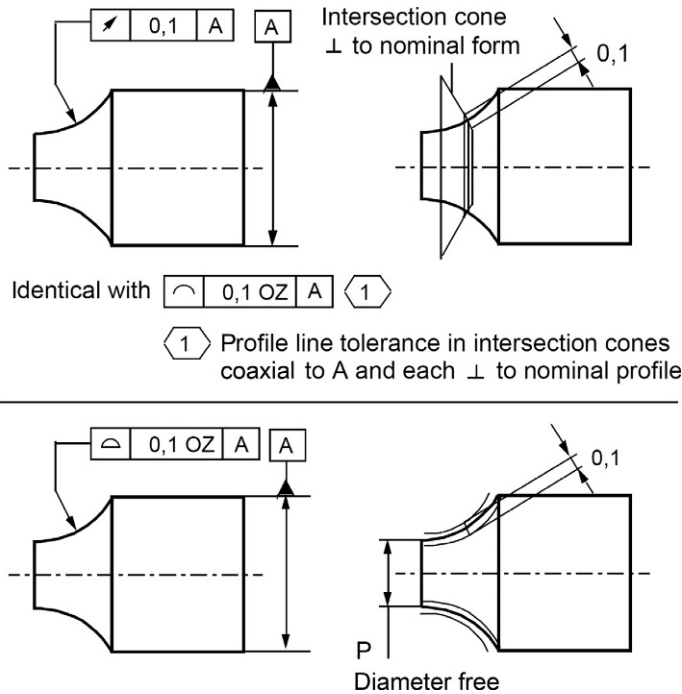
Circular total run-out tolerance in any direction, profile tolerance
